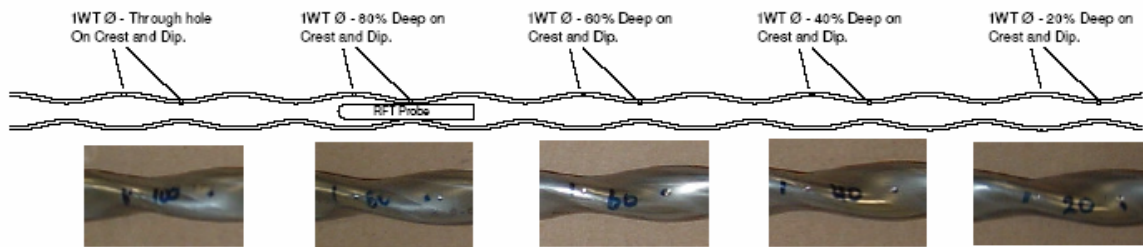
Crest and Dip defects machined into the Tube.
